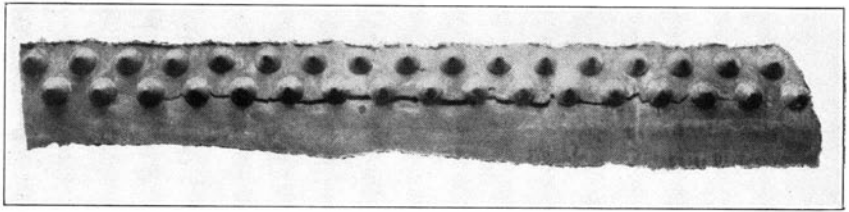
EMBRITTLED DRUM WHICH RUPTURED UNDER 425-LB. STEAM PRESSURE
